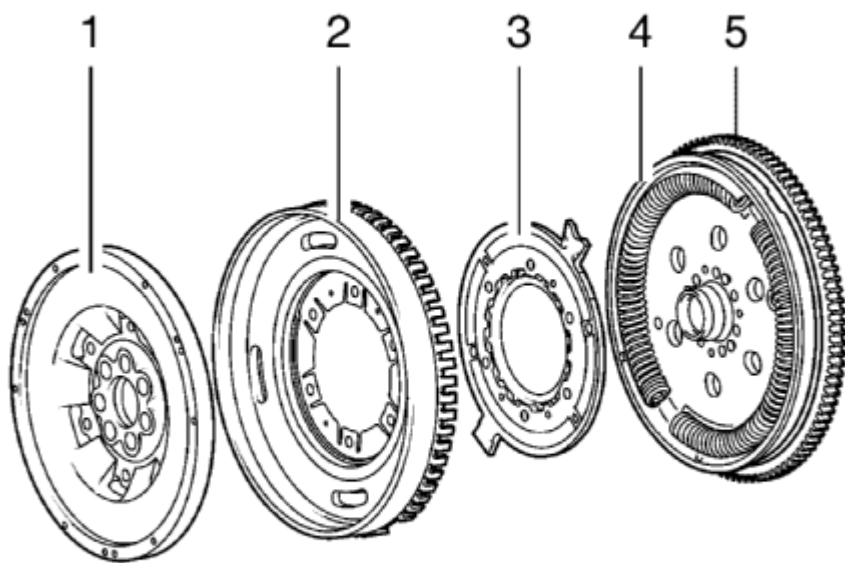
Exploded View Dual Mass Flywheel with Additional Mass
